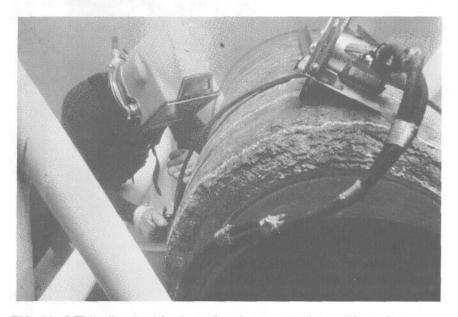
This diver/welder is performing a wet-stick weld repair on a platform in the Gulf of Mexico. (Courtesy Chicago Bridge and Iron/ SeaCon Services)
